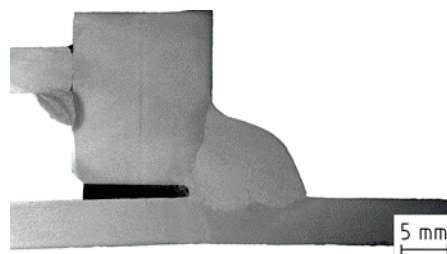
Macrograph of fillet weld joint between cylindrical part of the sleeve and pipe
